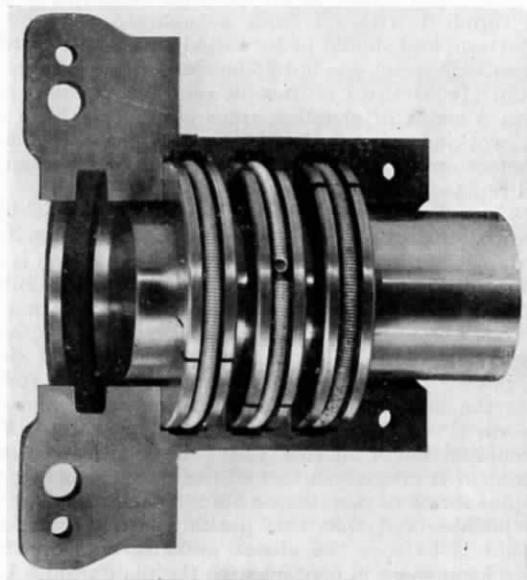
HOUSING FOR RINGS OF BRITIMP PACKING.
